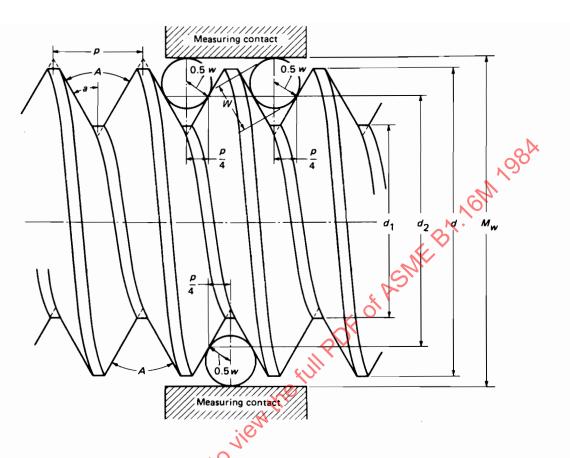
A THREE-WIRE METHOD OF MEASURING PITCH (THREAD GROOVE) DIAMETER OF THREAD PLUG GAGES
